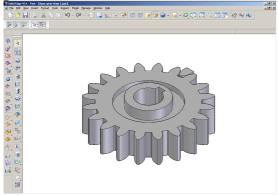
The constructed tooth's profile pinion using the Protrusion command.
